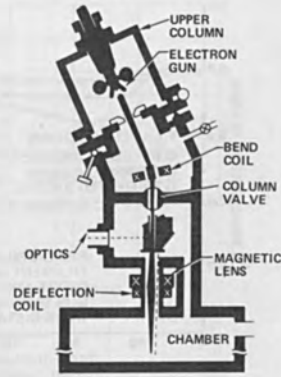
KW WELDING MACHINE SCHEMATIC
